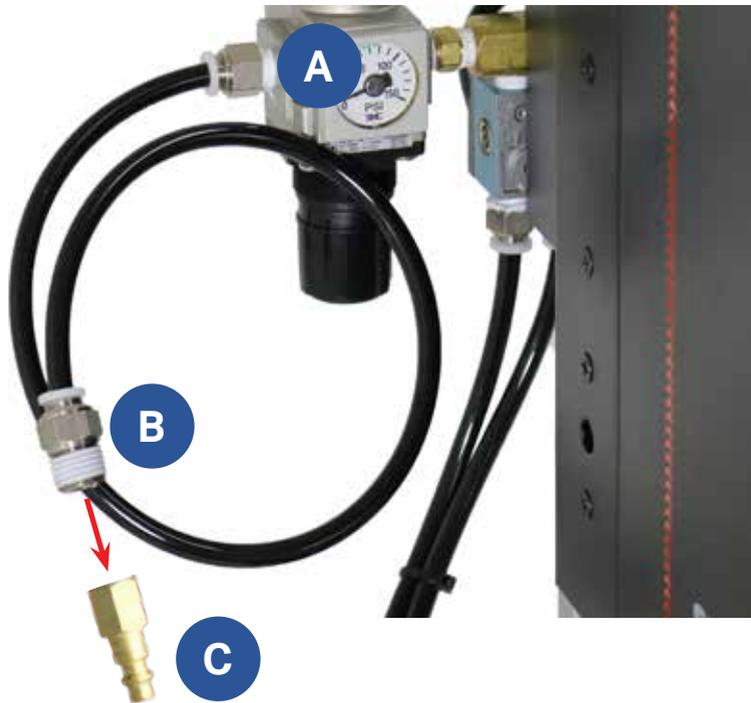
Connect the included 1/4" air hose to the air hose port (A) located on the left side of the MAC Valve. Next, connect the provided silver fitting (B) to the other end of the air hose. Then connect the hose to a supply of compressed air using a brass connector (C) (not included).
